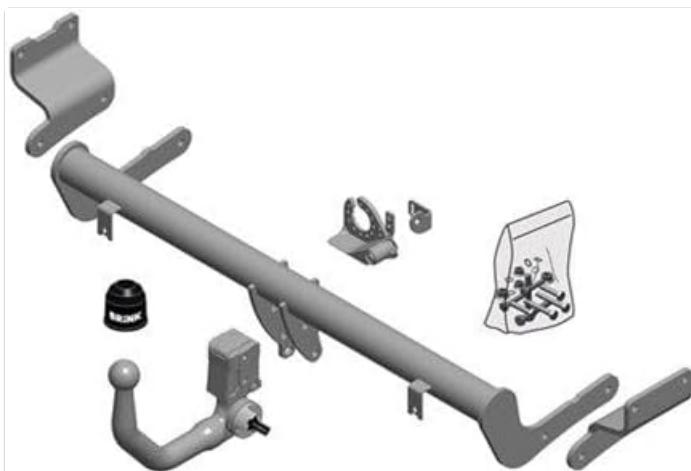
Exploded view showing the main components of the BRINK 674700 tow hitch, including the main beam, detachable ball joint, and mounting hardware.
